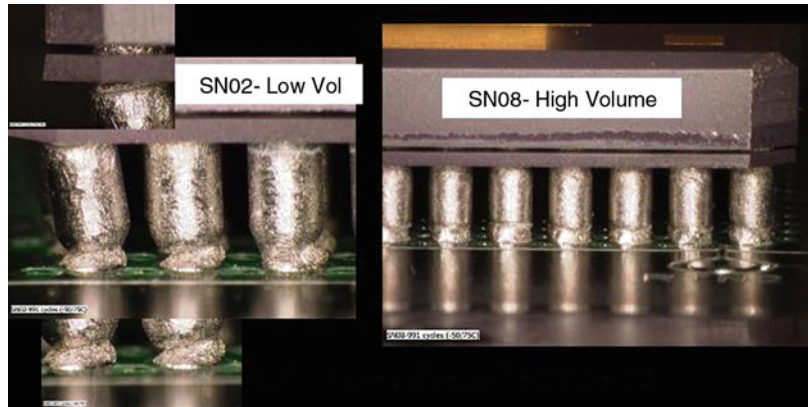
presents optical images of solder joint damage conditions for assemblies with low and high solder volume after 991 thermal cycles
